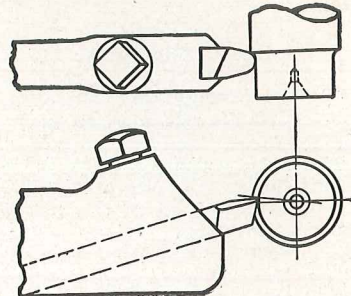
A.—A tool ground for machining cast iron, tool steel, high carbon steel and other hard metals. The angle of clearance and rake are not so sharp as for machining soft steel. Angle of keenness, 80° to 85° .
